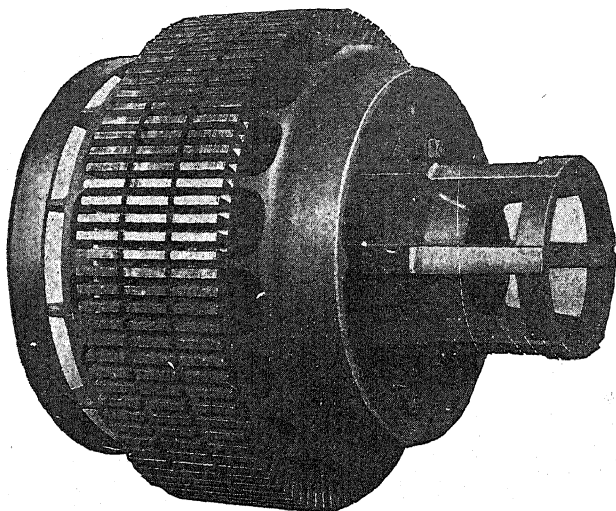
Crocker-Wheeler armature core, built up of steel discs. *In construction*, the discs are assembled in groups and mounted on a cast iron spider.
